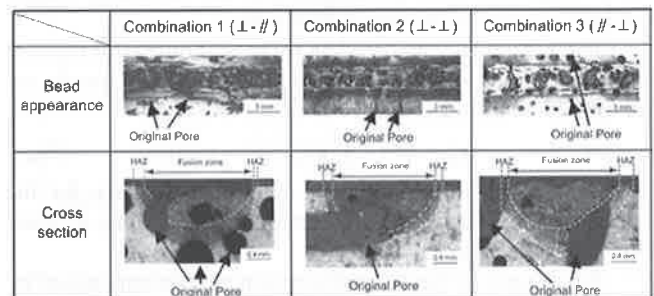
Bead appearance and cross section of Lotus iron welds; laser power of 1.0 kW, laser spot diameter of 1.0 mm, and welding speed of 1 m·min⁻¹ [8].
